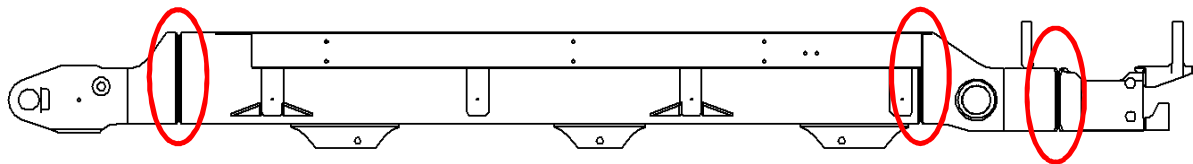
Typical weld locations of block connections to chassis with single weld around
